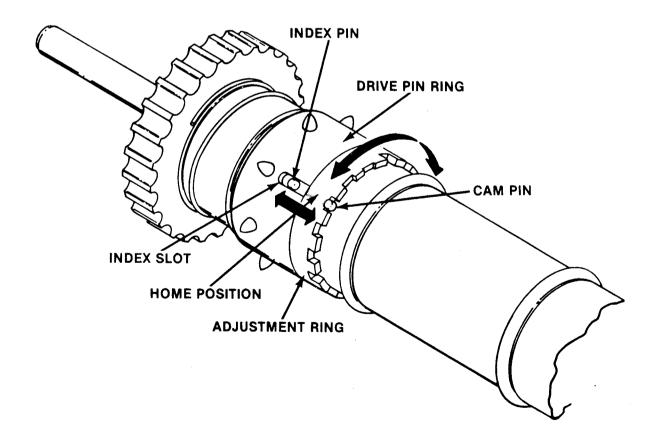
ADJUSTABLE DRIVE ROLLER DETAIL
